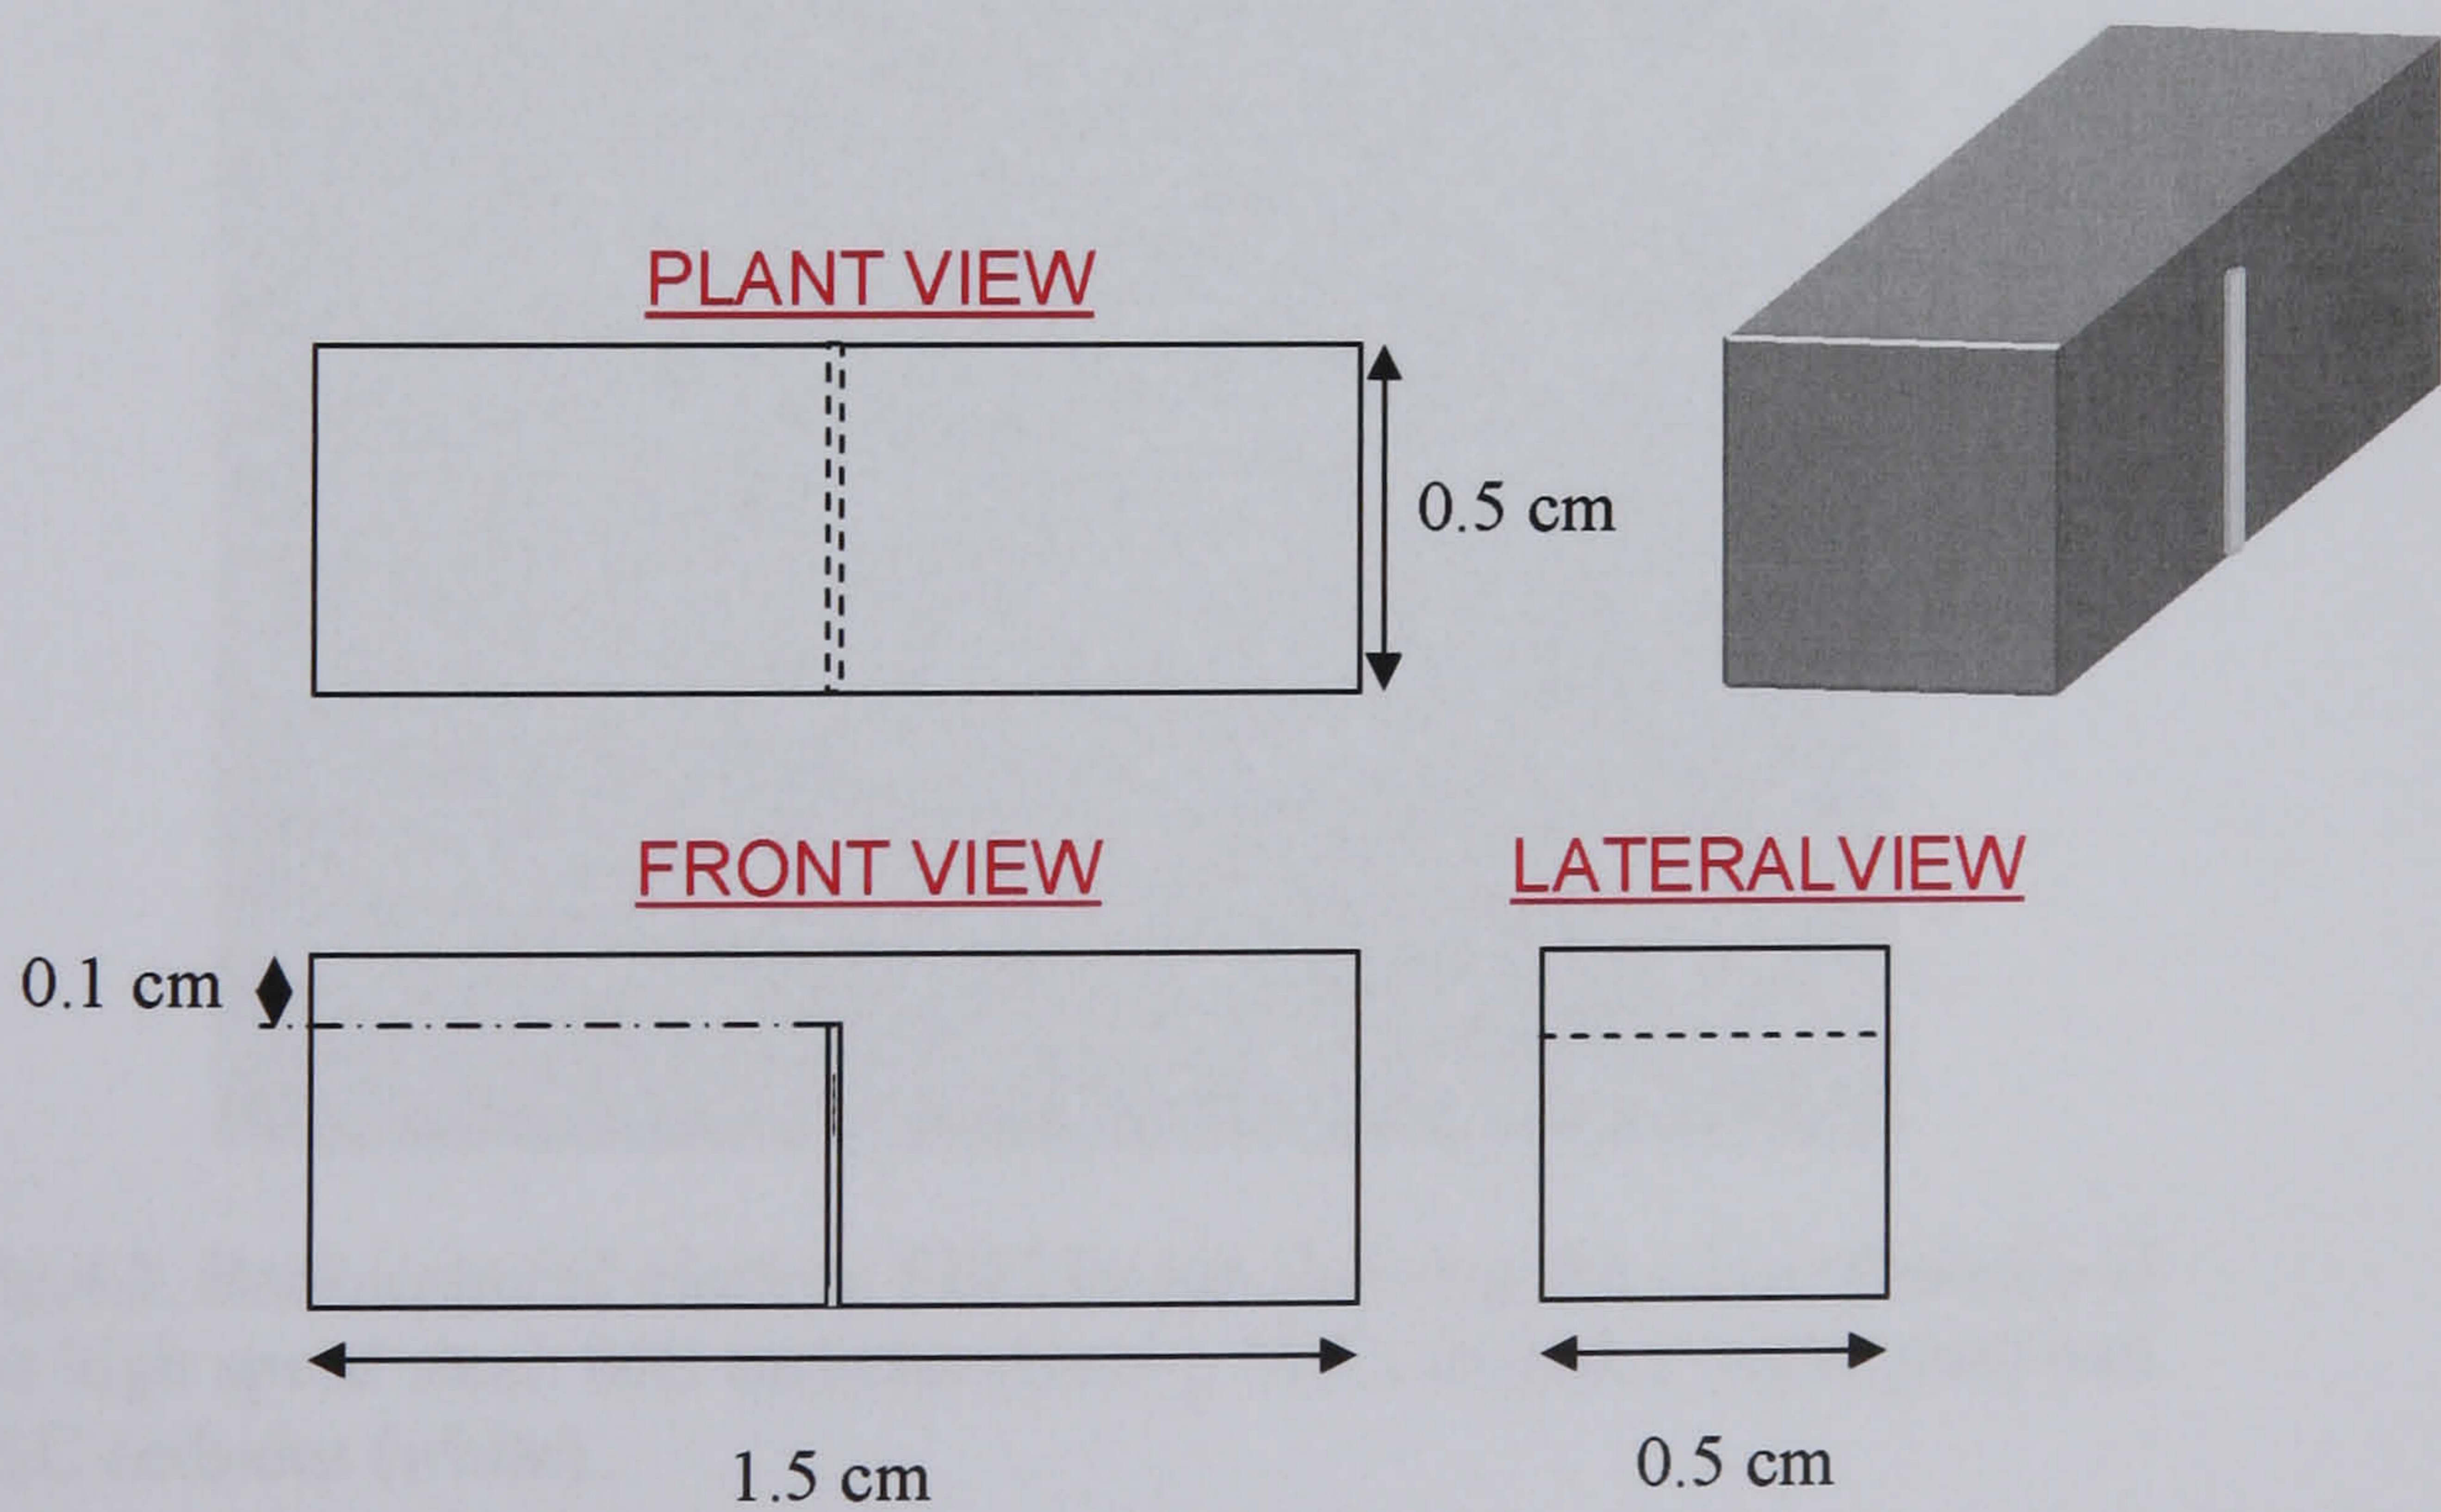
Notched specimen for the creation of fracture surfaces of the oxide layer.
